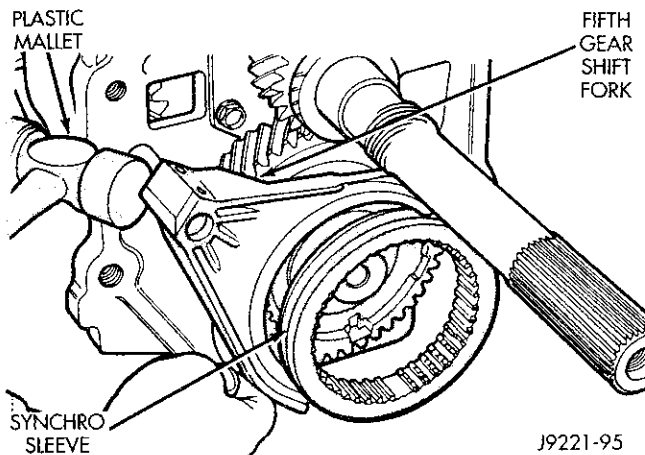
Fifth Gear Shift Fork And Sleeve Removal
